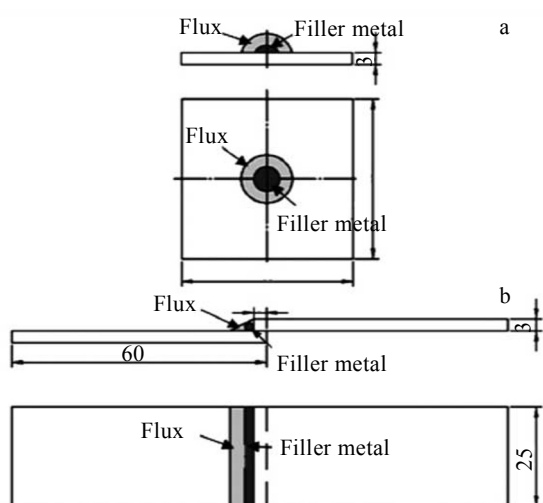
Schematic illustration of the experimental set up: (a) spreading test and (b) lap joint for shear testing
